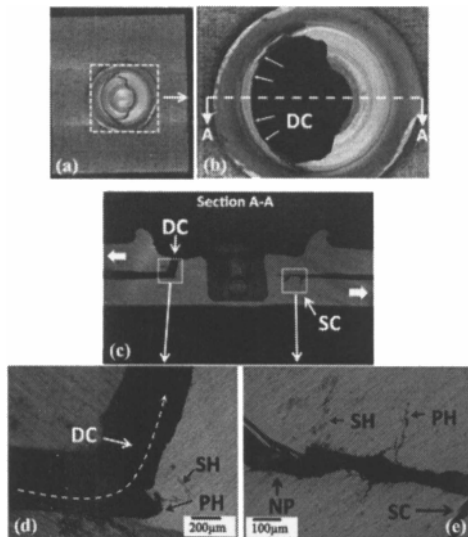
Crack propagation and failure mechanisms for process #1 coupon loaded at a maximum cyclic load of 3 kN at R=0.3. An overview image of the (a) surface of the top sheet and (b) a magnified view of the location of surface crack initiation. (c) A section view of the weld nugget shows that the dominant crack (DC) propagated from the weld interface, and (d) and (e) show higher magnification images of the interfacial primary (PH) and the secondary (SH) hooks. Bold arrows in (c) indicate direction of applied loading.
